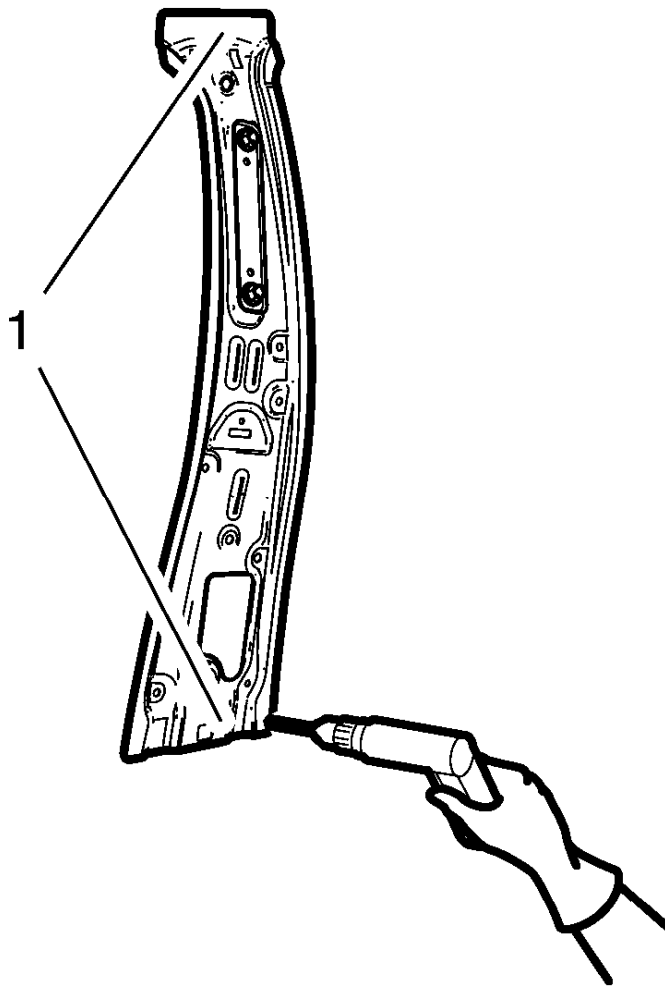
Drilling Holes Plug Welding Holes In New Center Pillar Inner Panel
